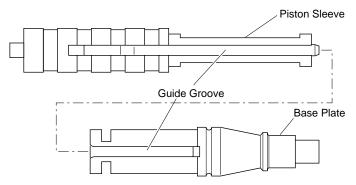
Sliding Base Plate Onto Piston Sleeve
